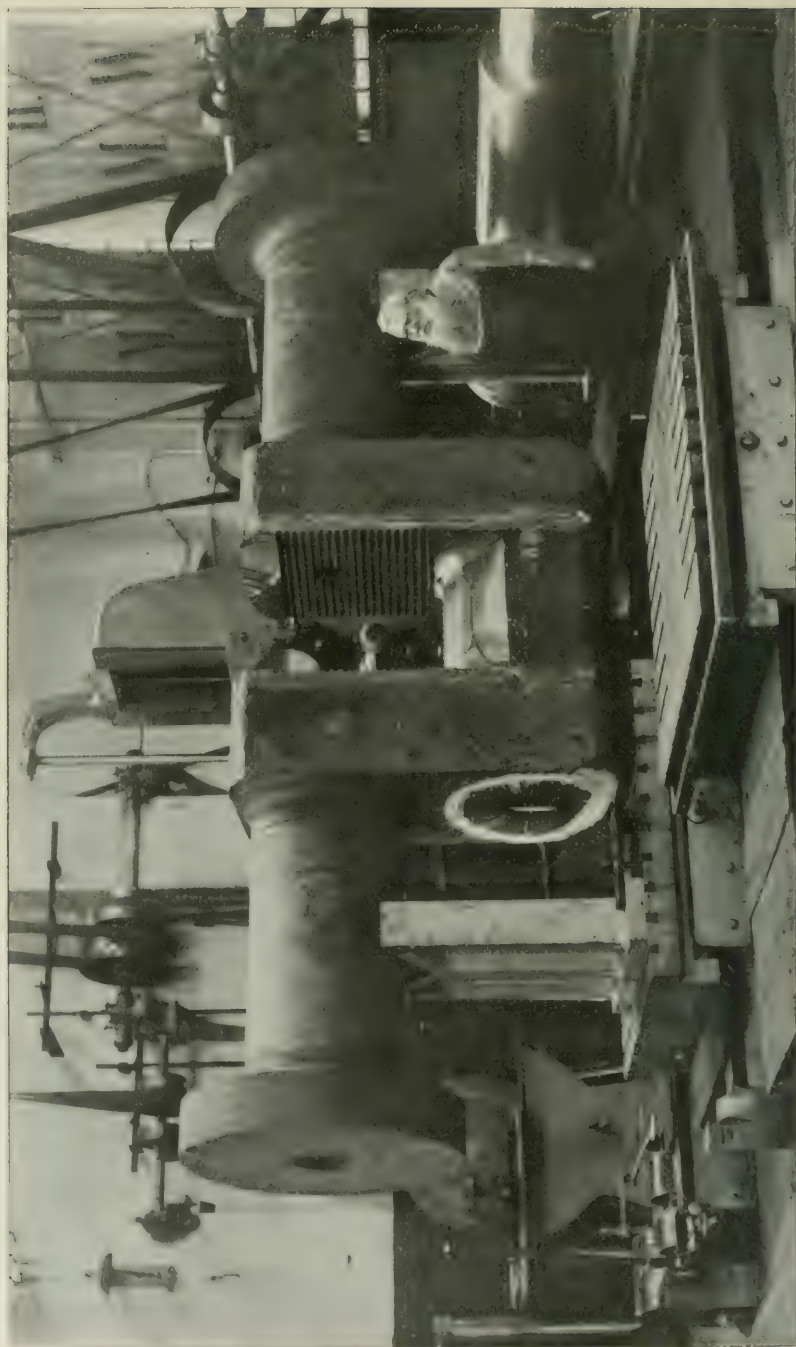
PART OF A SHAFT IN THE ROUGH MACHINED STATE.
